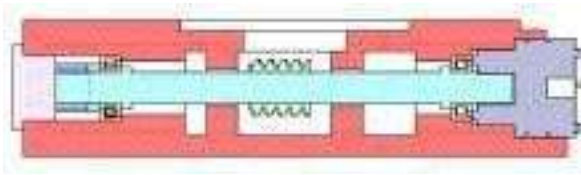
Worm Shaft Supported By Taper Roller Bearing
